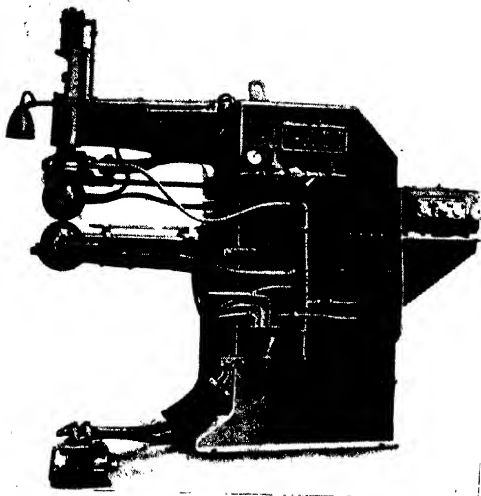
AIR-OPERATED SEAM WELDER WITH INTERCHANGEABLE TYPE HEAD
